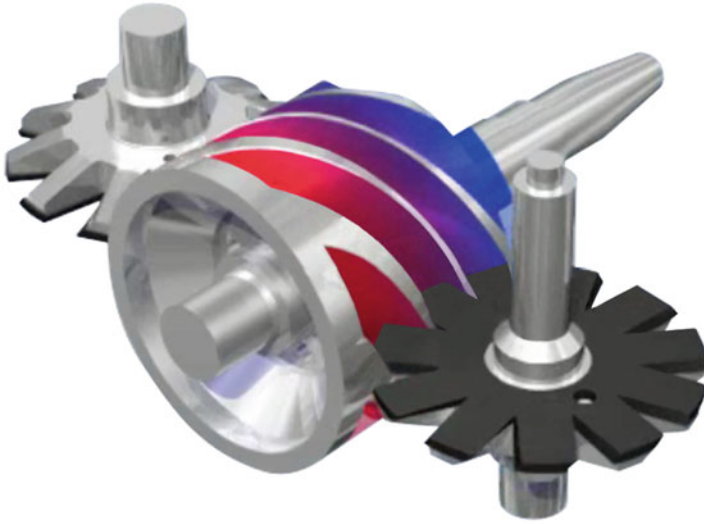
Single-screw compressor (courtesy of Vilter Manufacturing, Sidney, OH)
